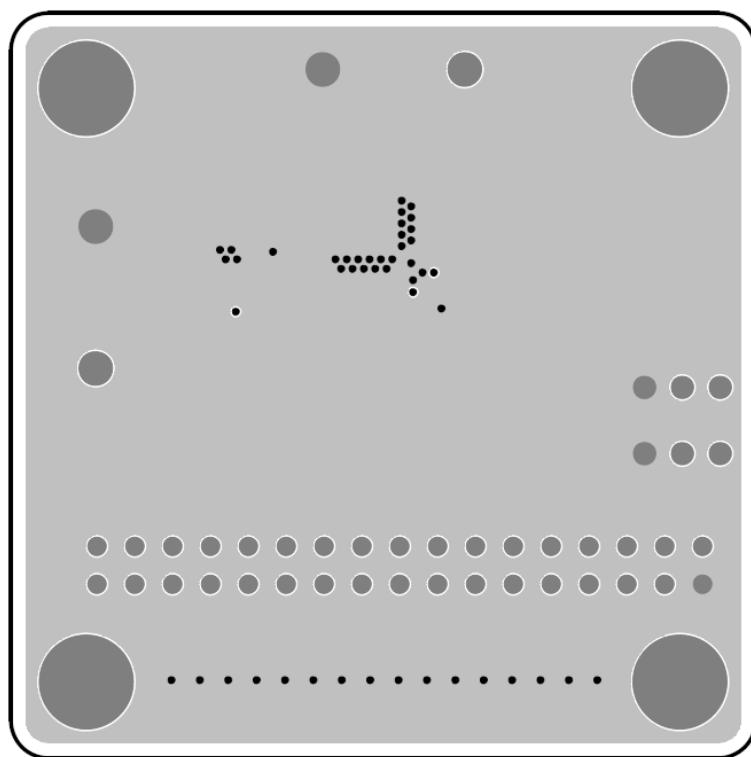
PCB Layout—Inner Side (3<sup>rd</sup> Layer)
